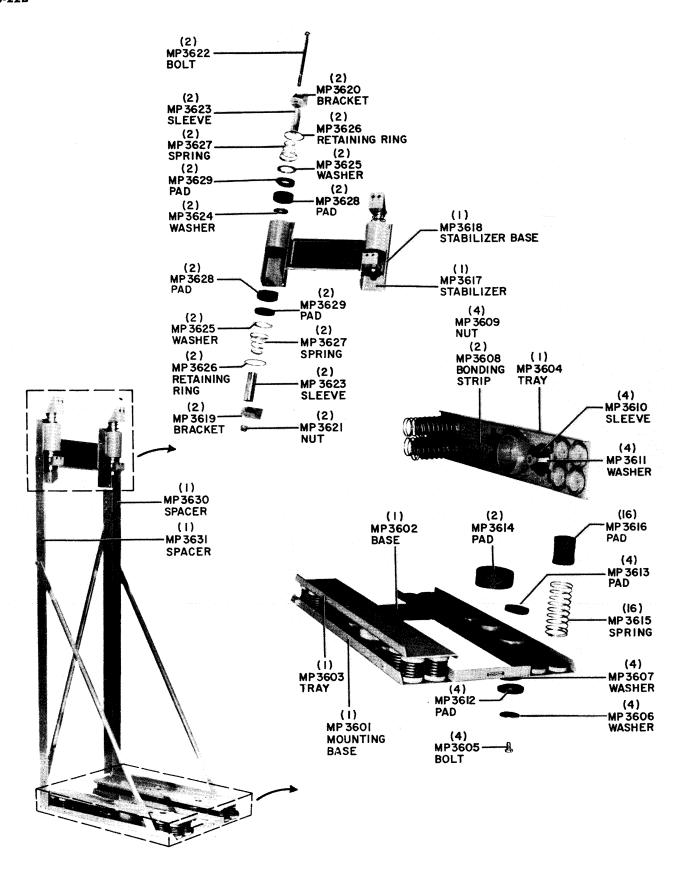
B. Mounting MT-2170A/WRT, Replacement of Parts
